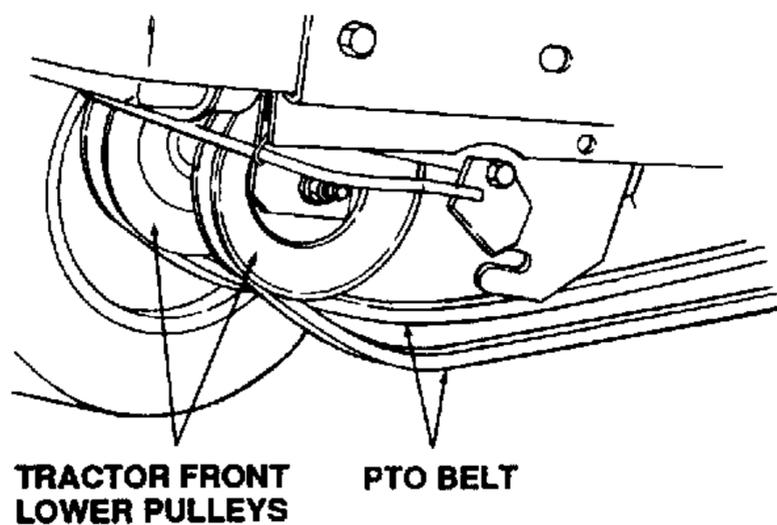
Place PTO Belt In Front Idler Pulleys
